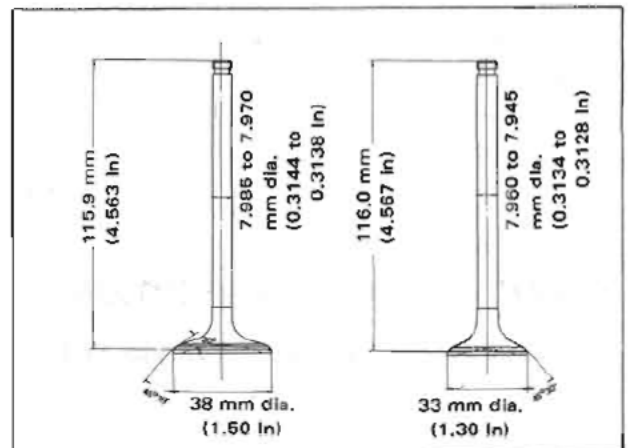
Valves for L20A and L24 (Single carb.)
